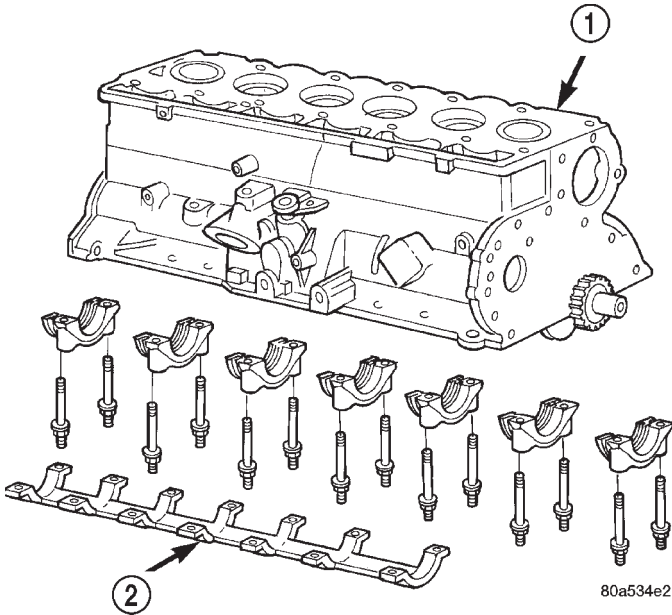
4.0L Cylinder Block with Main Bearing Caps and Cap Brace
